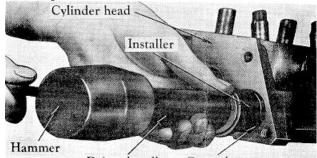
Adjusting Valve Guide Installer SE1943 for Proper Height
